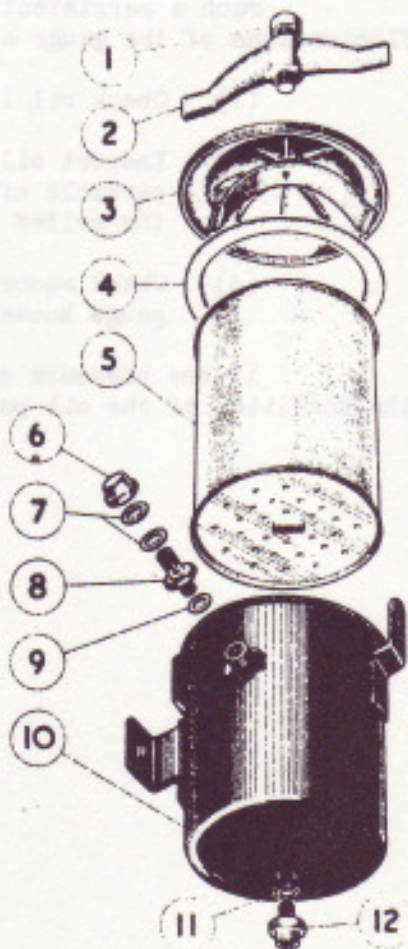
EXPLODED VIEW OF "GENERAL" BY-PASS OIL FILTER.
